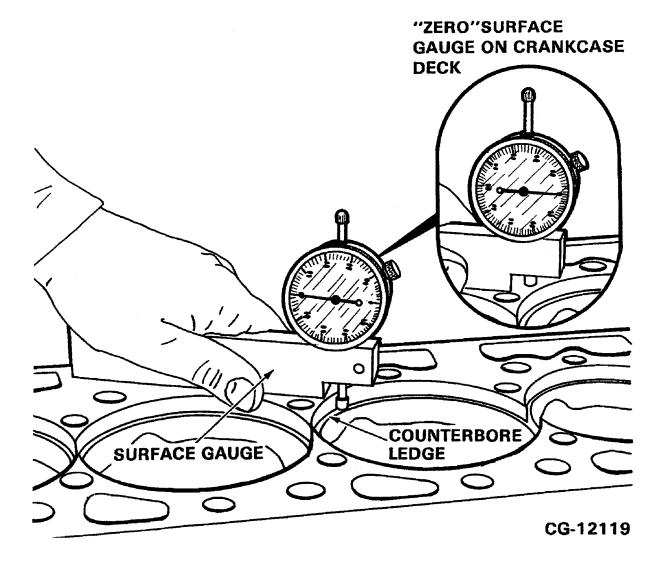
Check Clearance Counterbore Depth Using Surface Gauge (ZTSE-2515)
